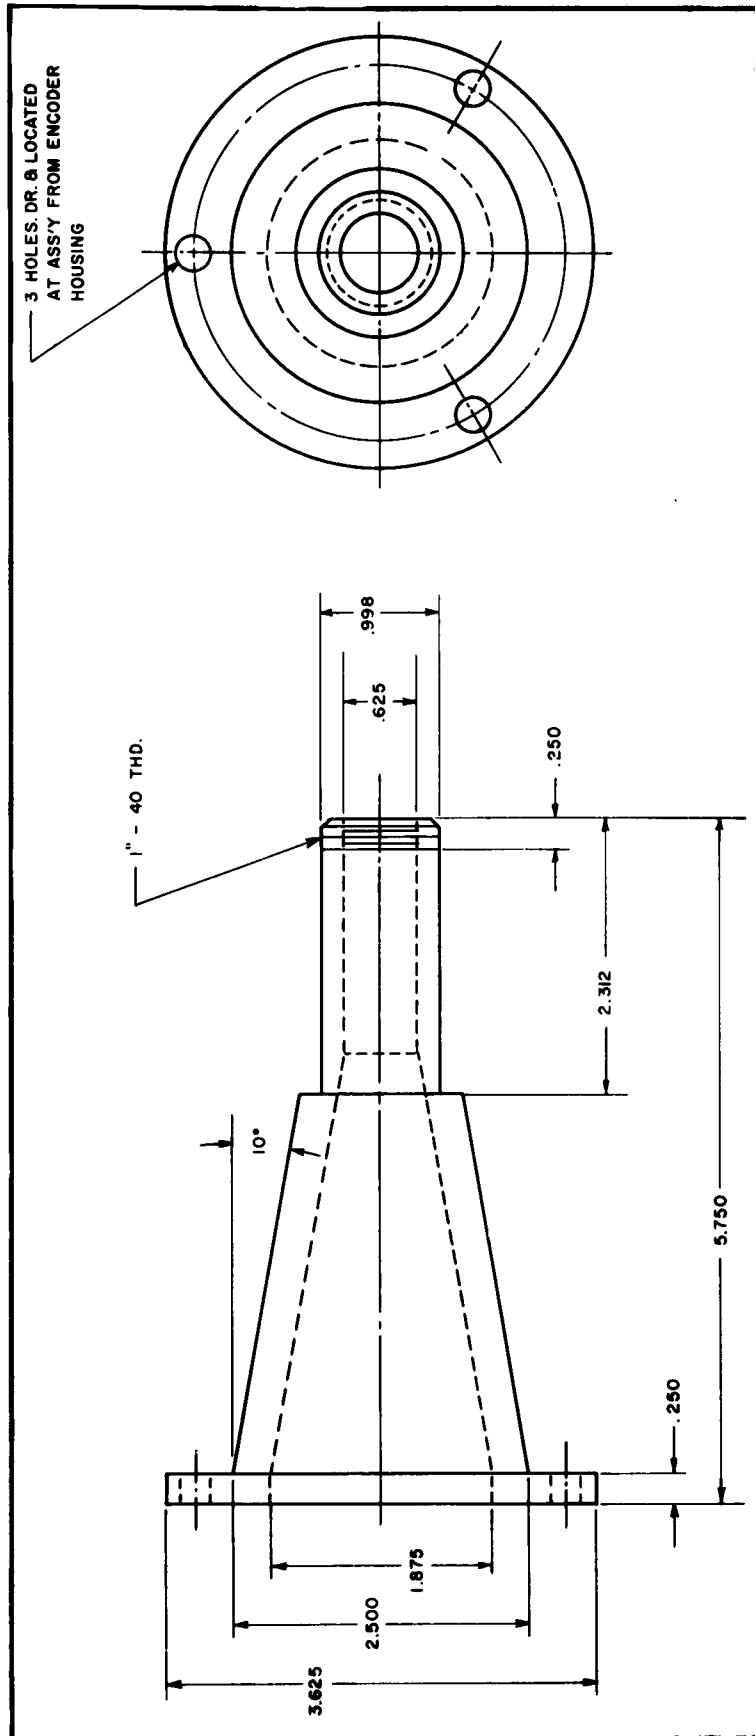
Detail Drawing of Azimuth Encoder Housing Adapter
